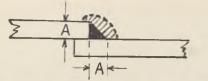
Fillet Weld for Lap Joint—shaded area showing bead.
